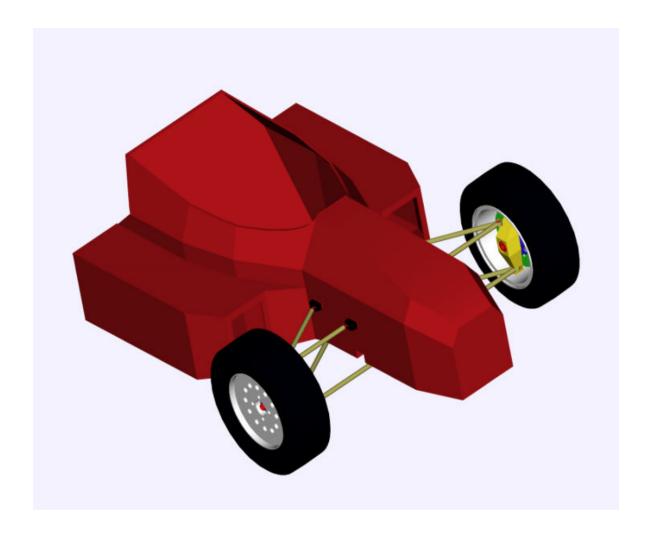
Pro/E Assembly of Chassis and front Suspension
